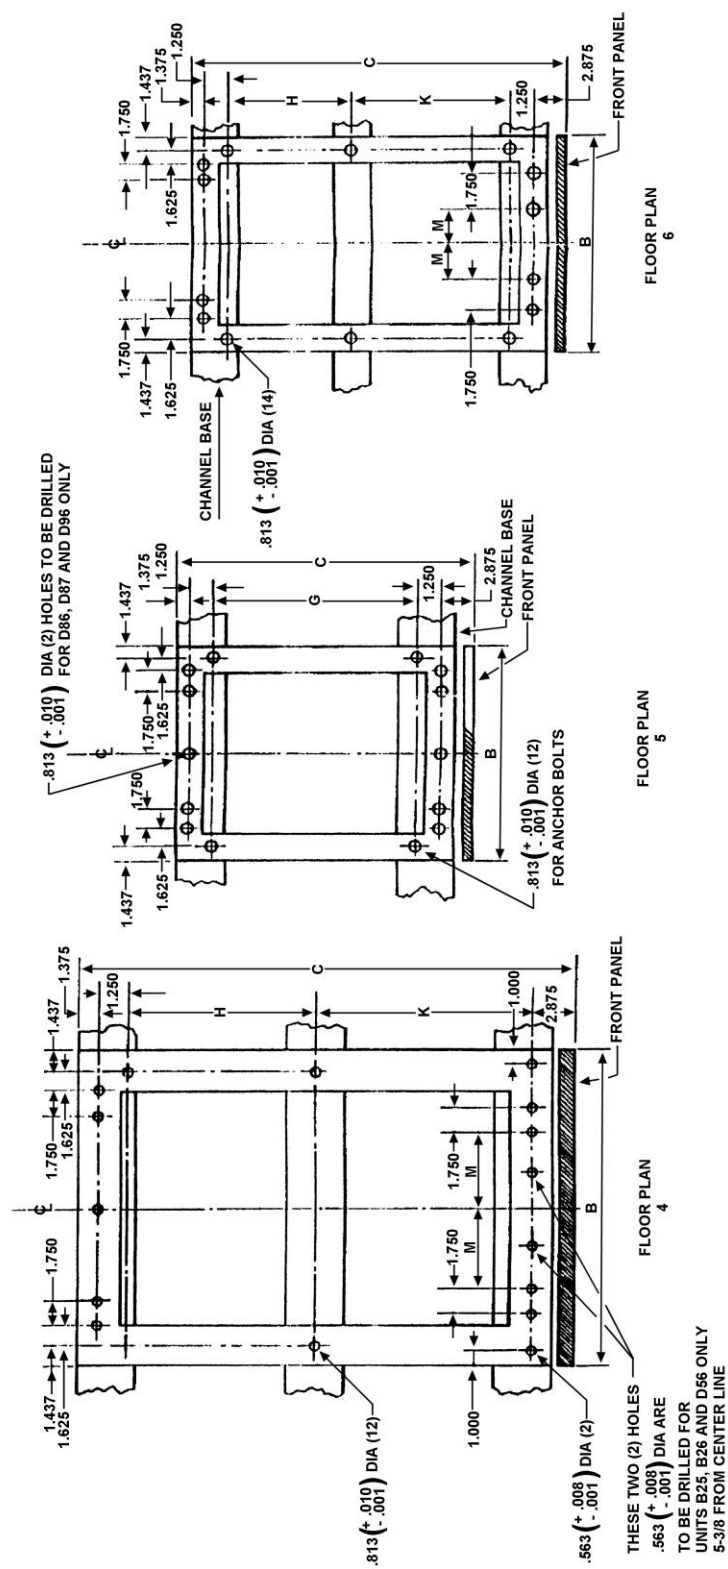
Standardized switchboard plans (sheet 2 of 2) – Continued.
